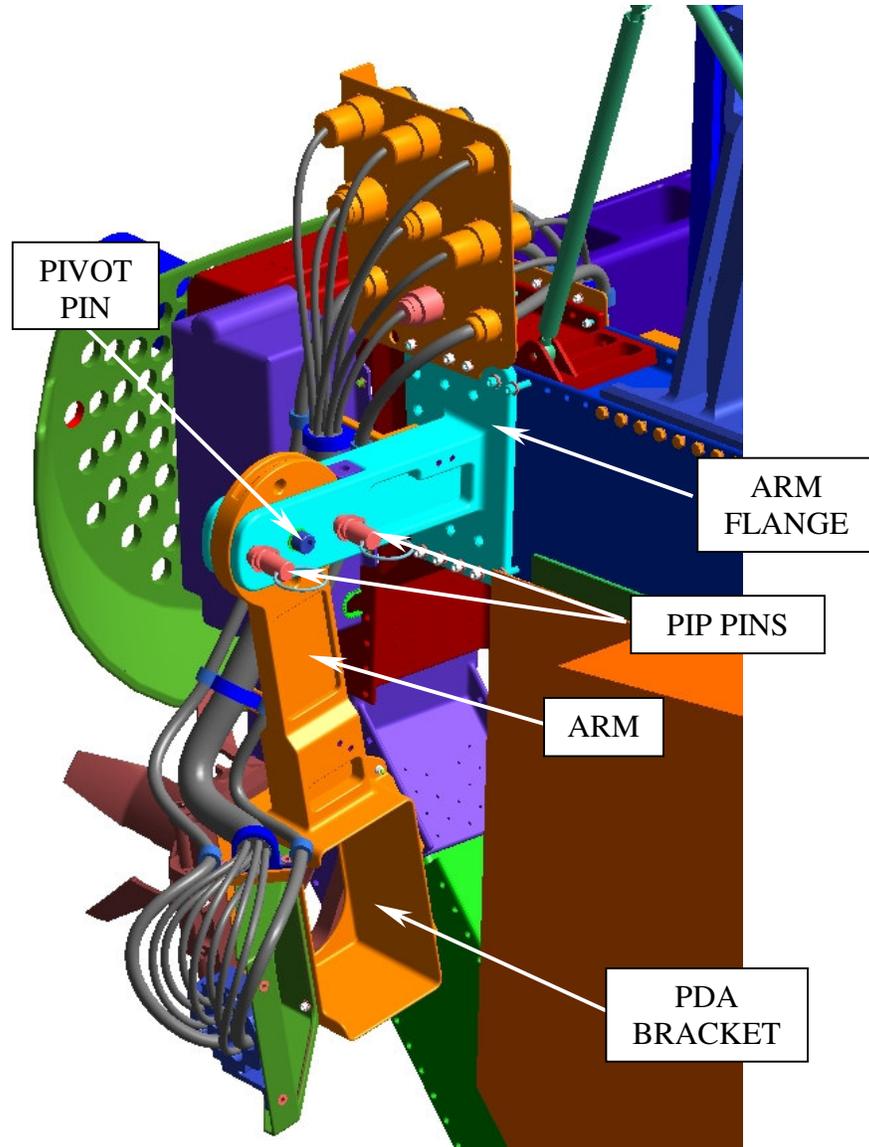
ROEU Assembly Folded Configuration (ISO View from Port Side)
